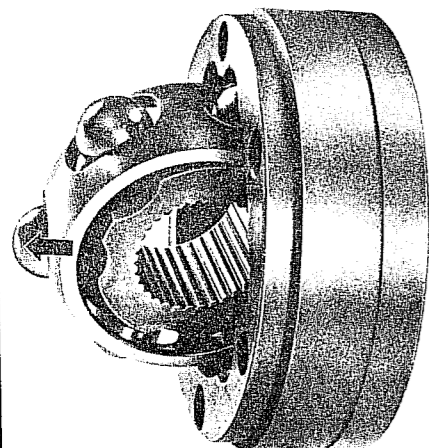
Push out the ball hub and ball cage in the direction shown.
